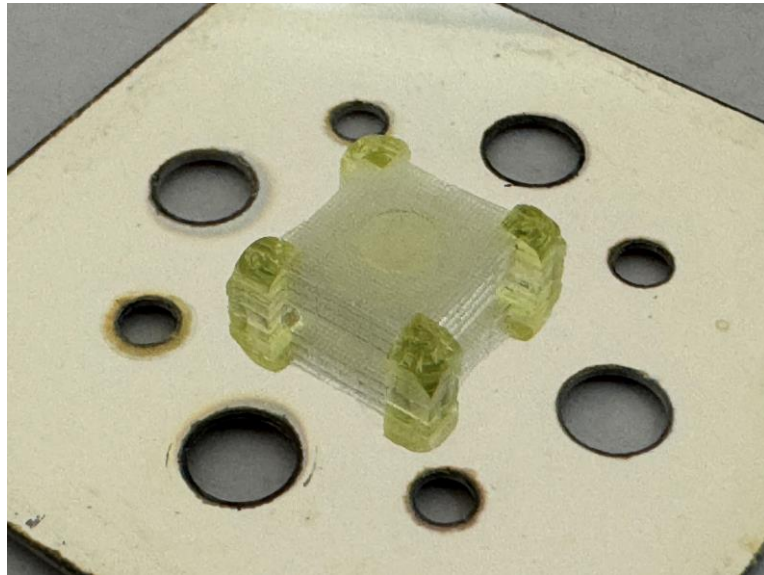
FPCA under a microscope for further inspection of the printed details.
